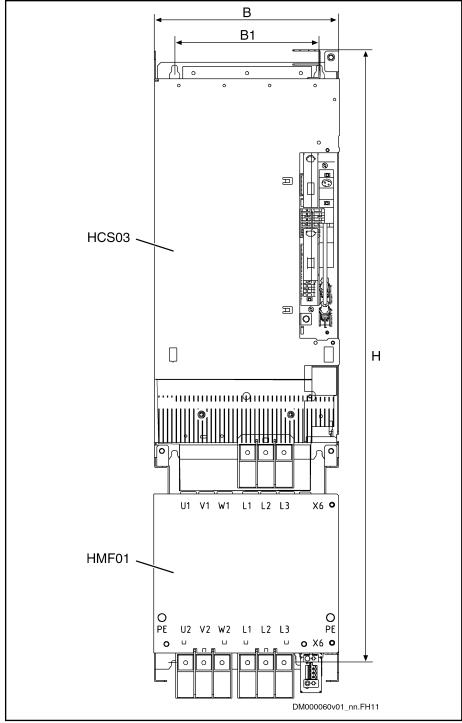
Mounting example HCS03.1E-W0100, -0150, -0210 / HMF01 motor
